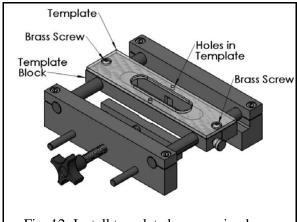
Install template by removing brass screws and placing template over dowel pins
